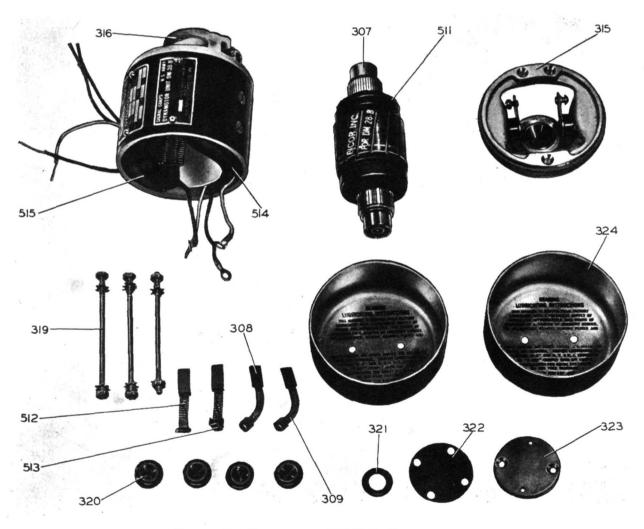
DYNAMOTOR DM-28-B, DISASSEMBLED
